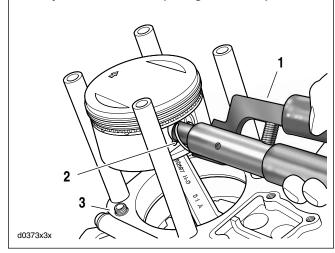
Pin Circlip Remover/Installer (Part No. HD-42317)
